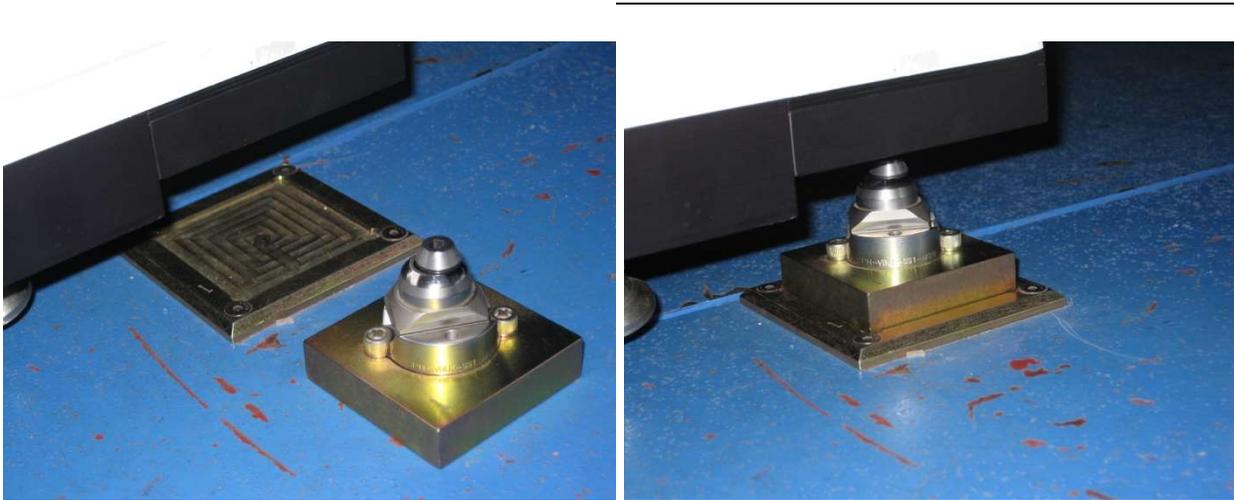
The spherolinder base plate and assembly are shown in the left photo. The assembly has been placed in the base plate in the right photo.
